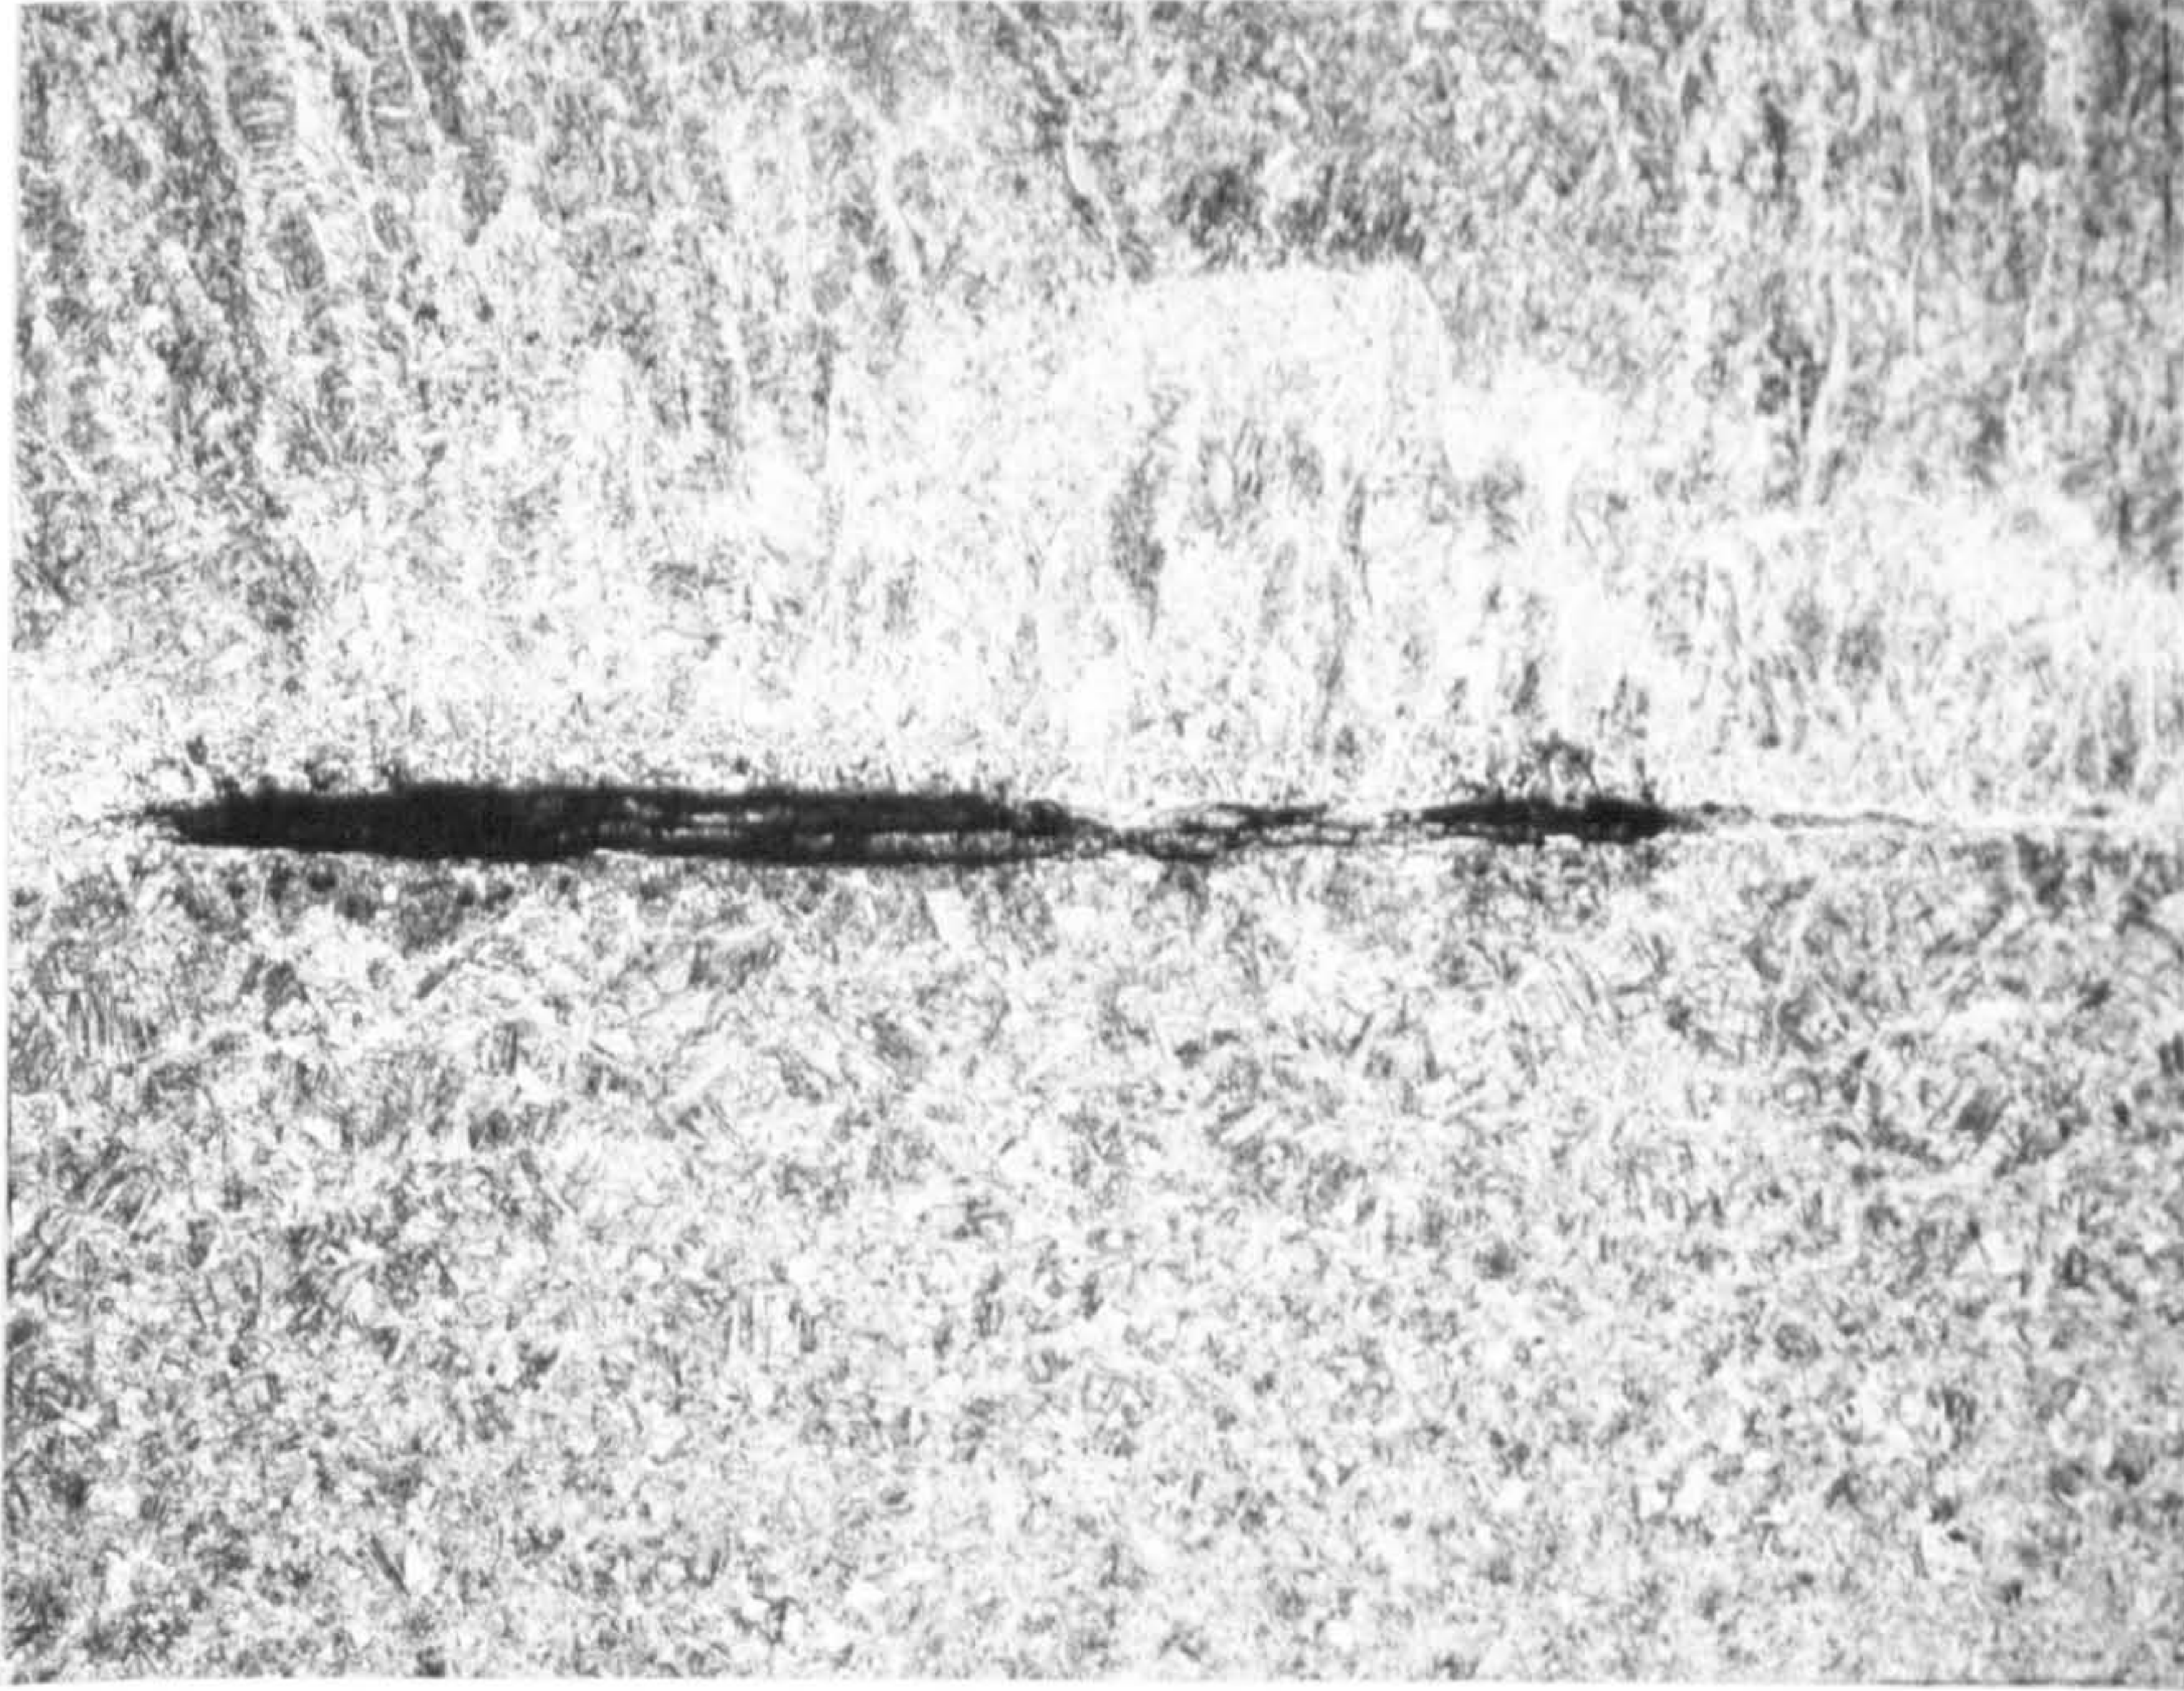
Lack of fusion with the face plate due to too high laser beam height in a 12mm skid weld (x64).
